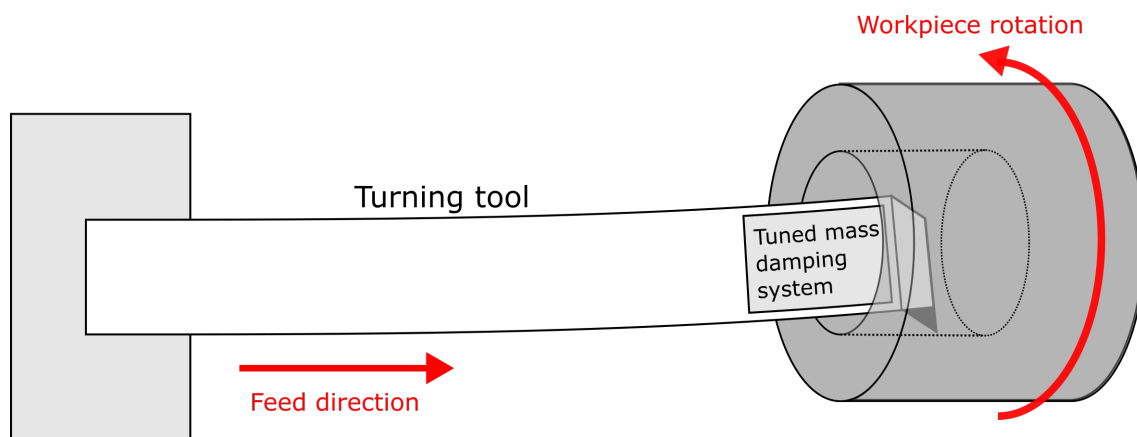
The general concept of internal turning. A single point cutting tool is used to create cylindrical holes in the rotating workpiece.
